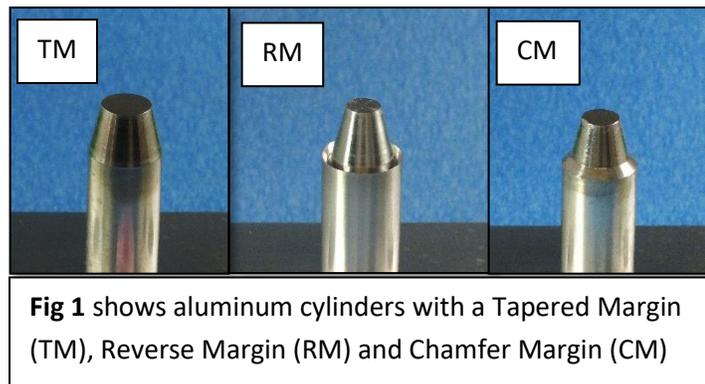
shows aluminum cylinders with a Tapered Margin (TM), Reverse Margin (RM) and Chamfer Margin (CM)
